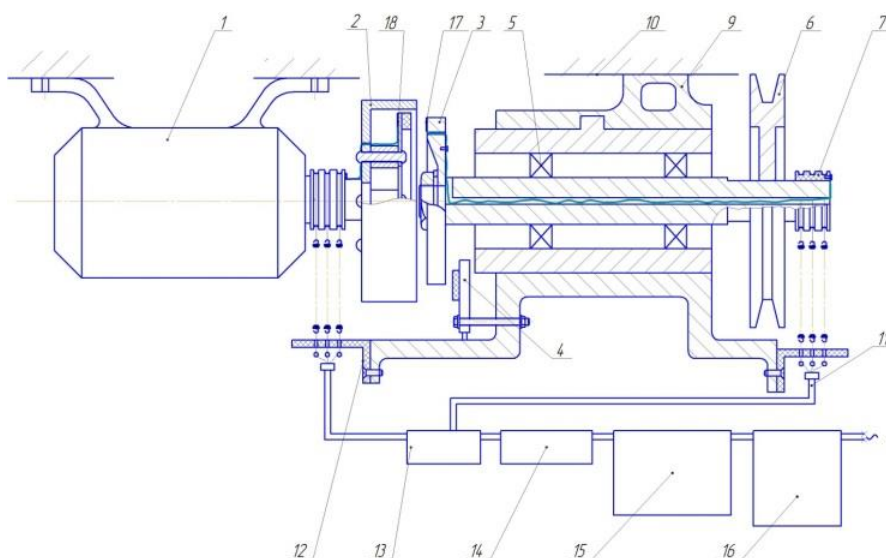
Scheme of the experimental setup for measuring the torque on the drive clutch of the sewing machine
